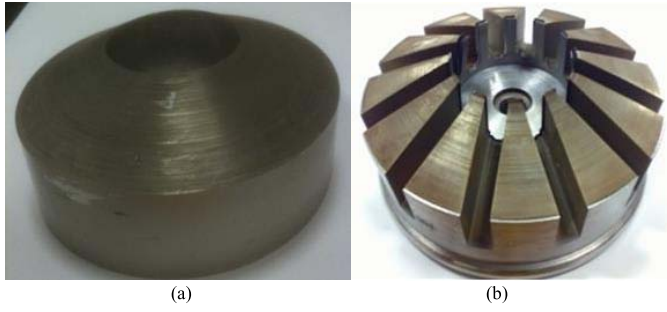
Principal manufacturing steps of the novel AMM machine. (a) Tapered AMM stator core before cutting. (b) After the core is cut with abrasive waterjet technology.
